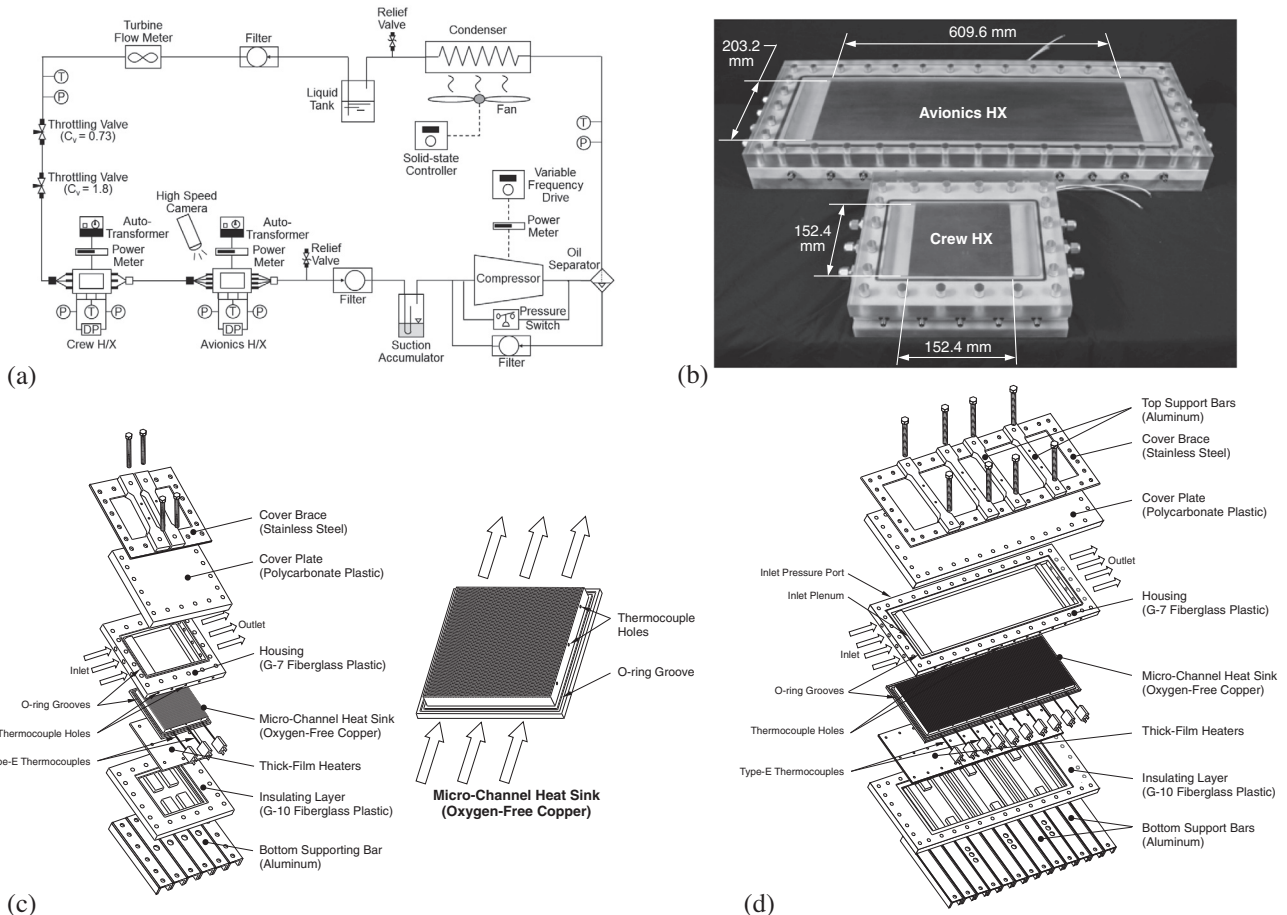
(a) Schematic diagram of vapor compression loop. (b) Photo of avionics HX and crew HX. (c) Exploded view of crew HX. (d) Exploded view of avionics HX.
